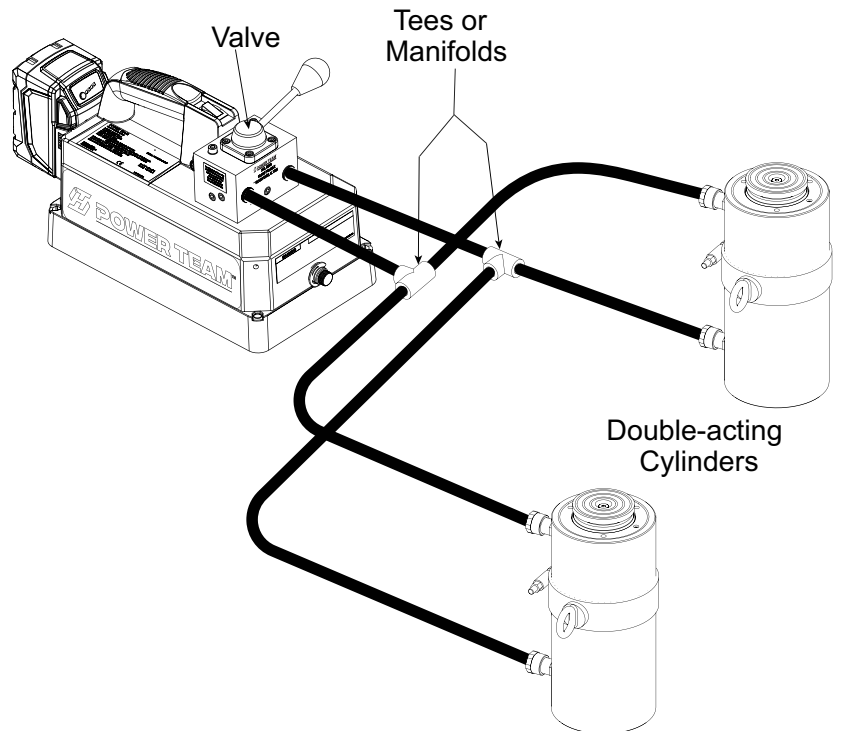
Double-Acting Cylinder(S) in the Circuit Controlled by a Pump-Mounted Valve
